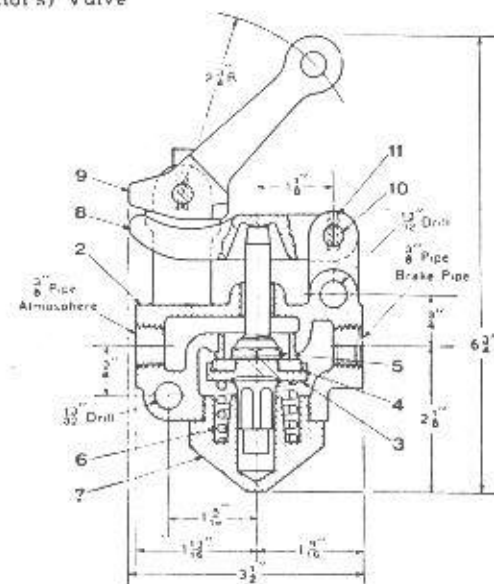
B-3-B Emergency-brake (Conductor's) Valve Assembly View
